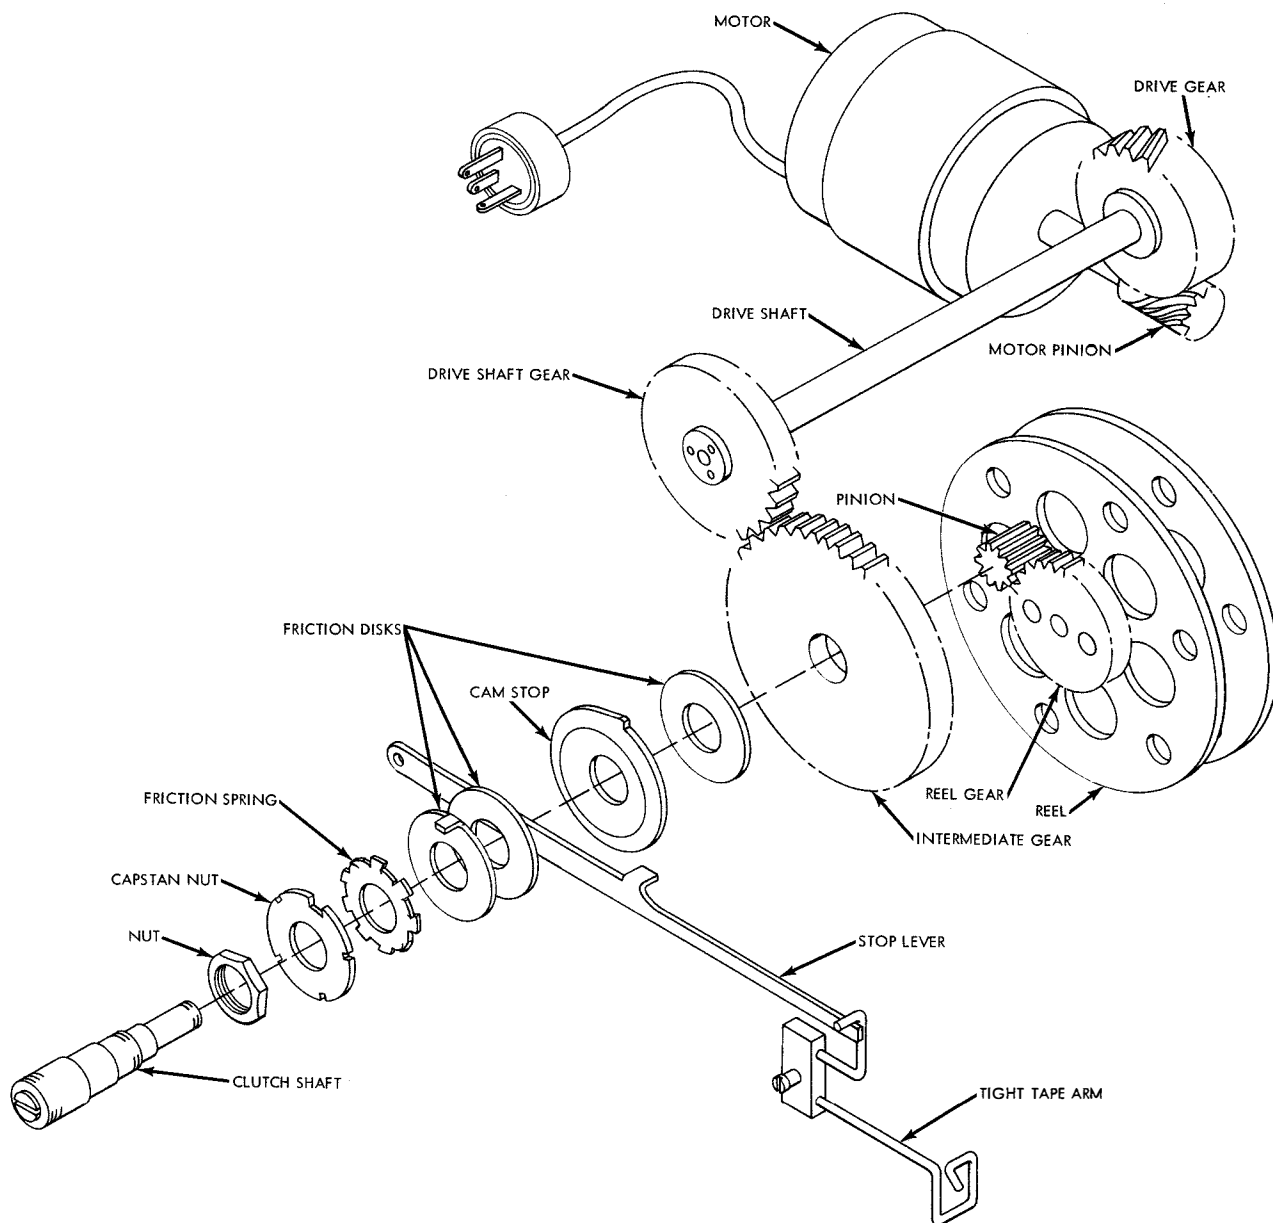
Motor Driven Tape Reeling Machine RL-173/FGC, Gear Train Diagram
